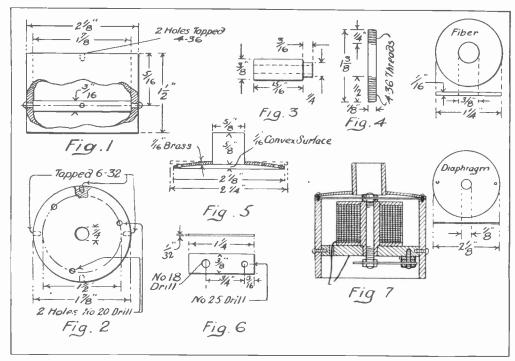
is a piece of cold rolled steel drilled through the center with a No. 20 drill and turned to the dimensions indicated.
